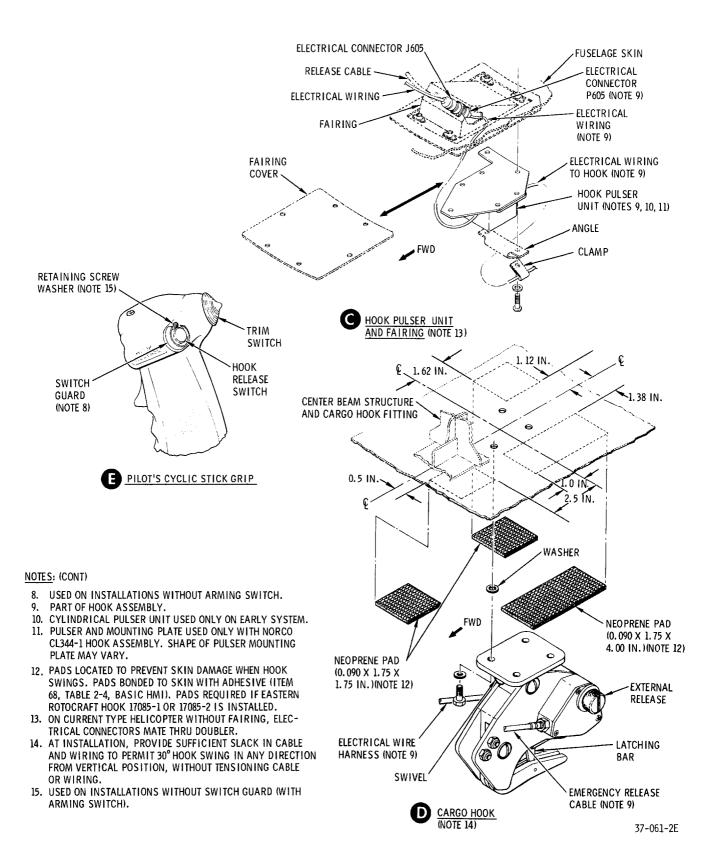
Cargo hook electrical equipment (sheet 2 of 2)
